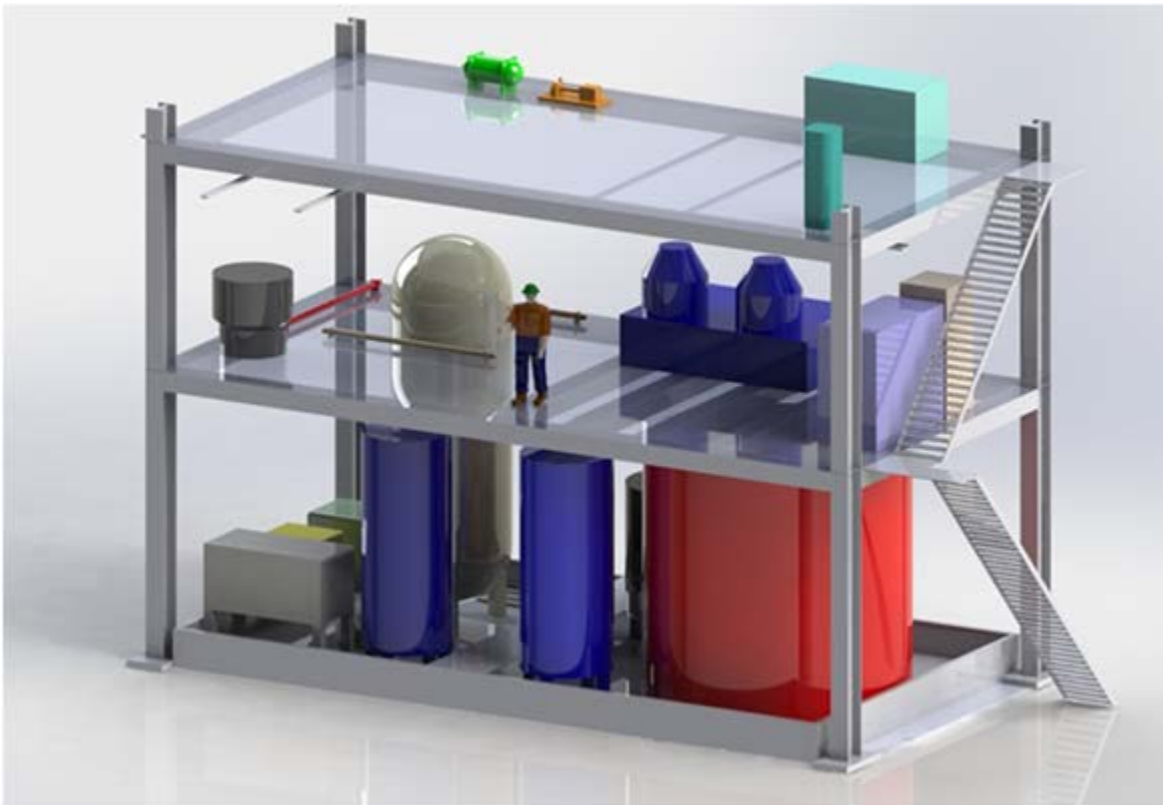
General arrangement of a 5Ton/h Slop processing plant, as installed in Setúbal Portugal.
